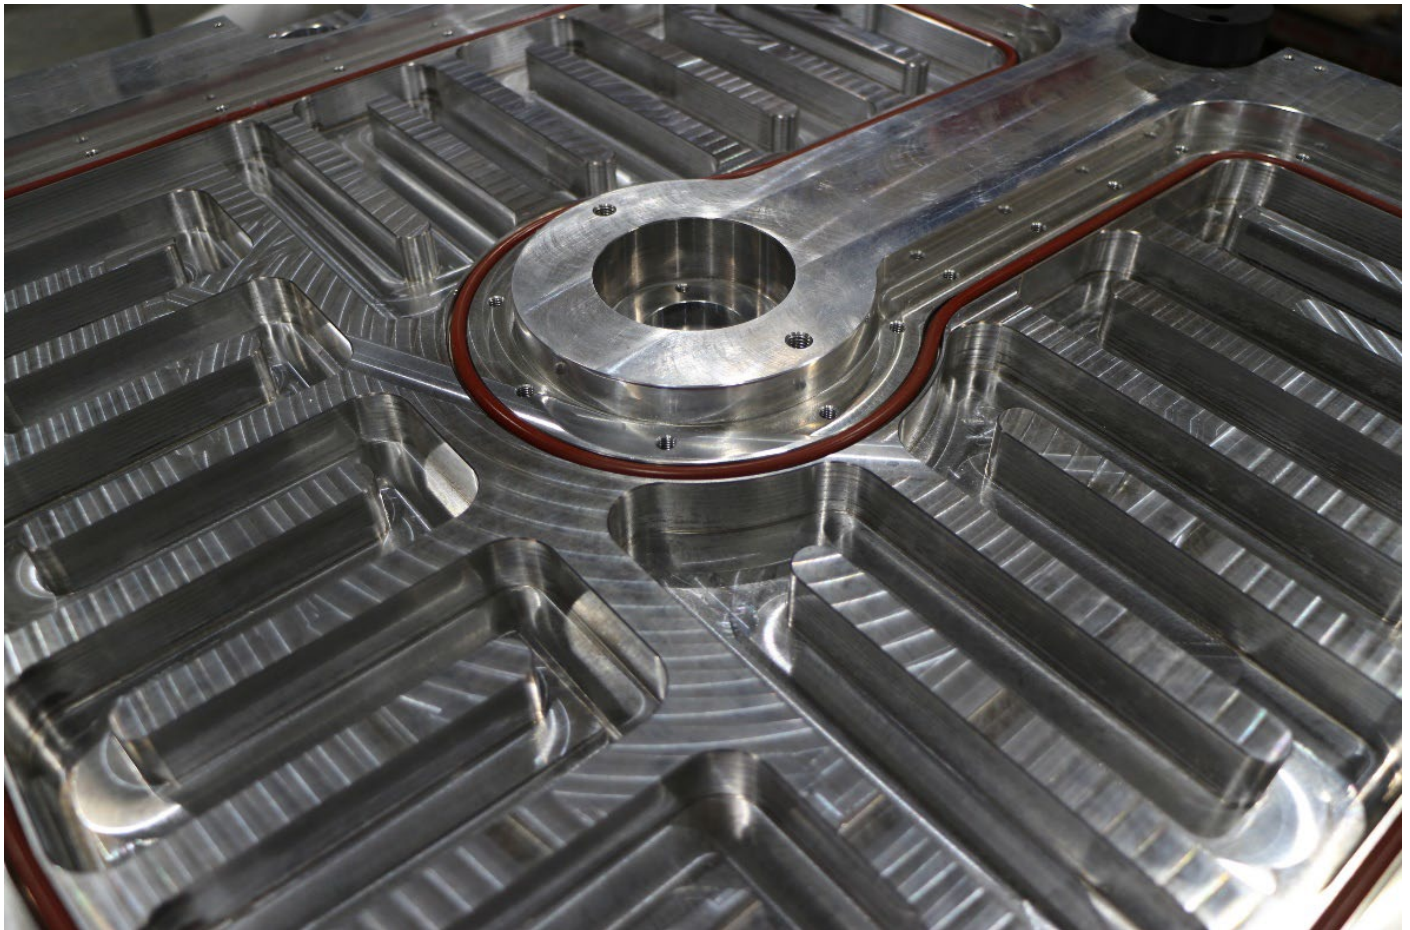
P20 steel RTM tool machined for oil heating. Photo courtesy of Composite Integration
